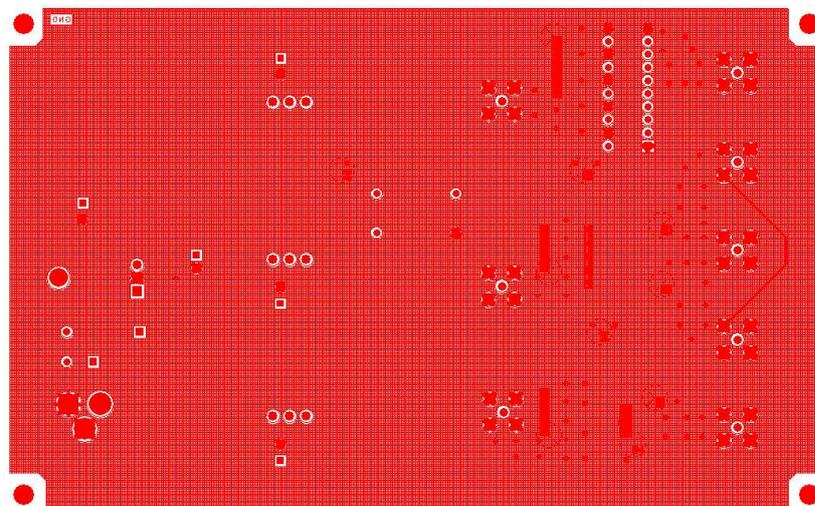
The Ground Bounce: Package Type Mk2 Bare Board (Bottom View)
